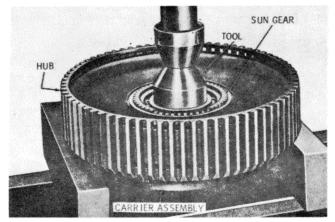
Pressing Splitter Carrier Assembly from Splitter Sun Gear Bearings
